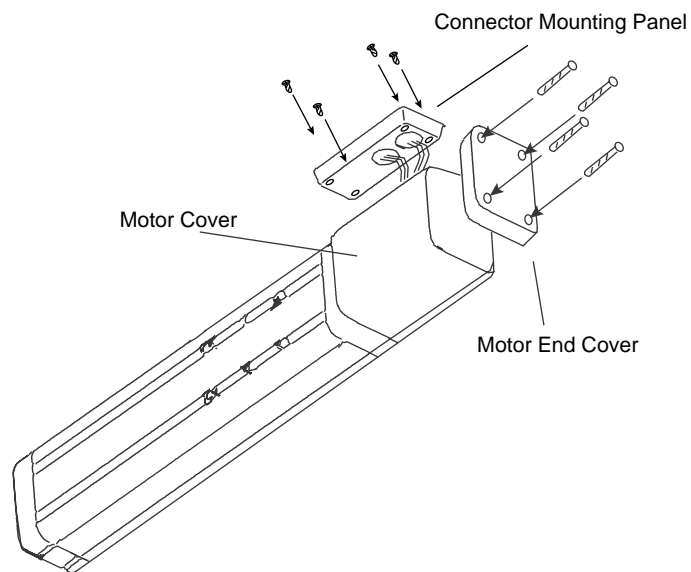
Attaching Motor Cover and Connector Cover Panel
